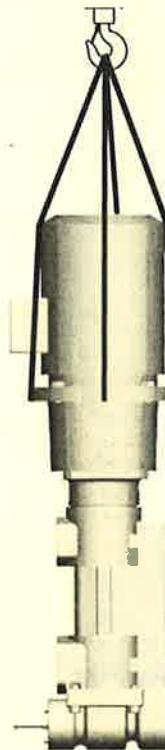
Fastening the lifting gear to the pump unit (vertical)
